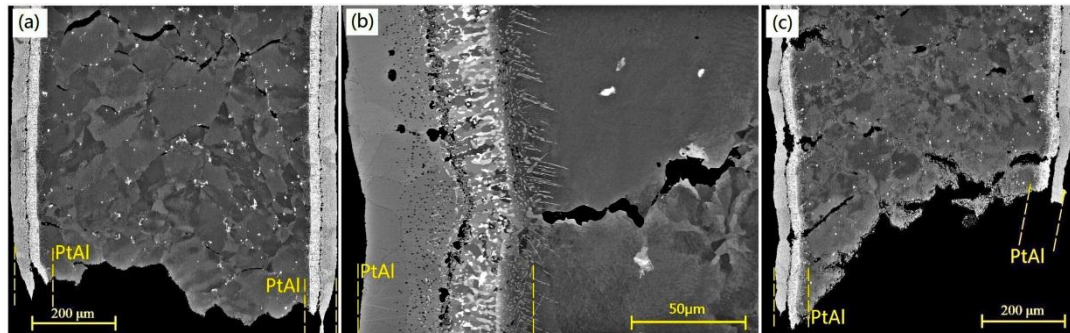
Fractured PtAl-PtAl sample: (a) morphology containing fracture surface (850 °C), (b) crack beneath PtAl (850 °C) and (c) morphology containing fracture surface (950 °C).
